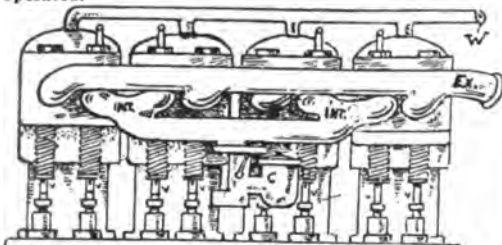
Cylinders are "L" shaped, all valves on one side. Note the four inlet and four exhaust valves on four cylinders. These valves are the "poppet" type and are mechanically operated.
